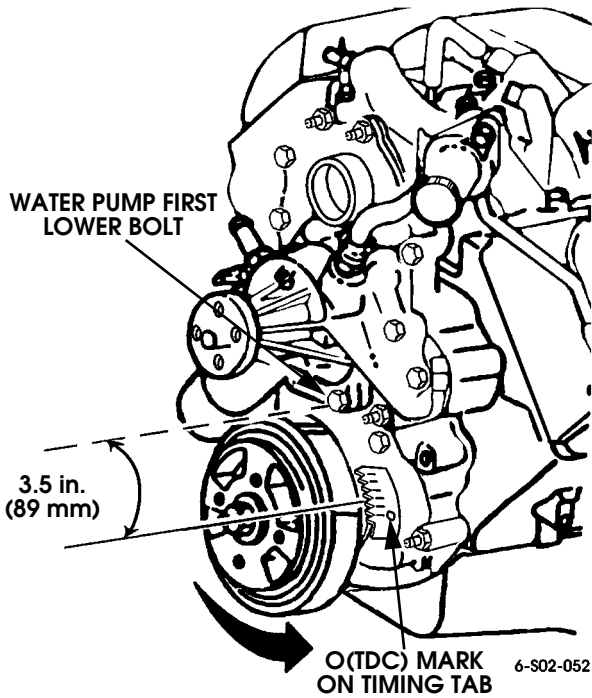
Crankshaft Index Position for Rocker Arm Installation
